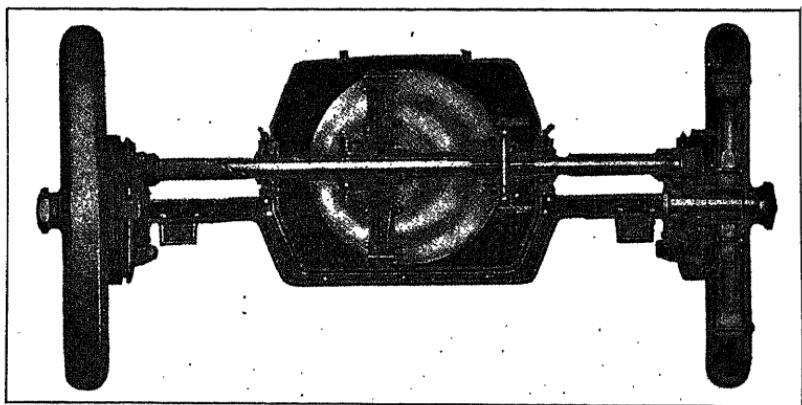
Kelsey automobile rear axle friction drive. Kelsey Motor Co.
